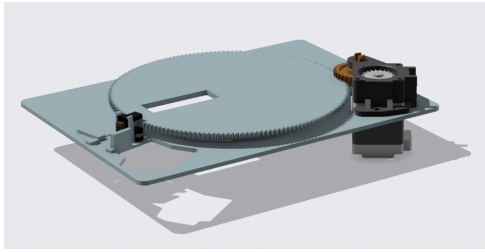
Rendering of the gearbox assembly. The assembly is composed of numerous gears and components affixed to a base plate. To assemble all the parts, several manual steps must be performed. Reprinted from Augmented Reality for Supporting Workers in Human–Robot Collaboration, Moya A. et al. [152], Copyright (2023).
